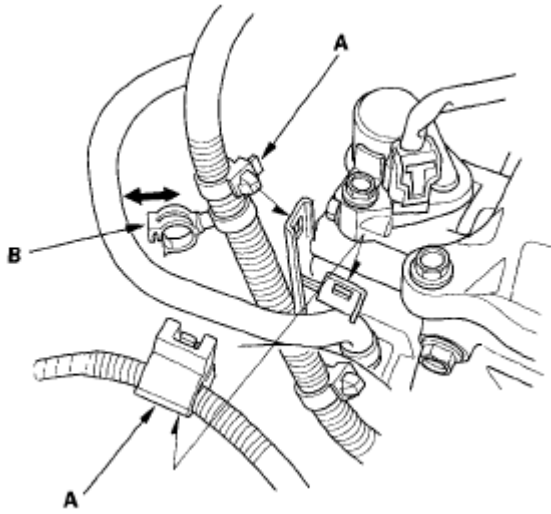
Identifying Positive Crankcase Ventilation Hose Clamp
